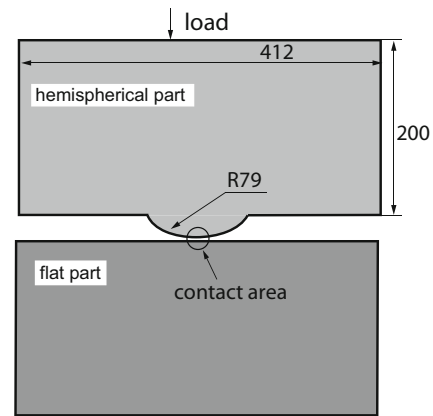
Dimensions of a spherical contact model; all dimensions are in millimetres
